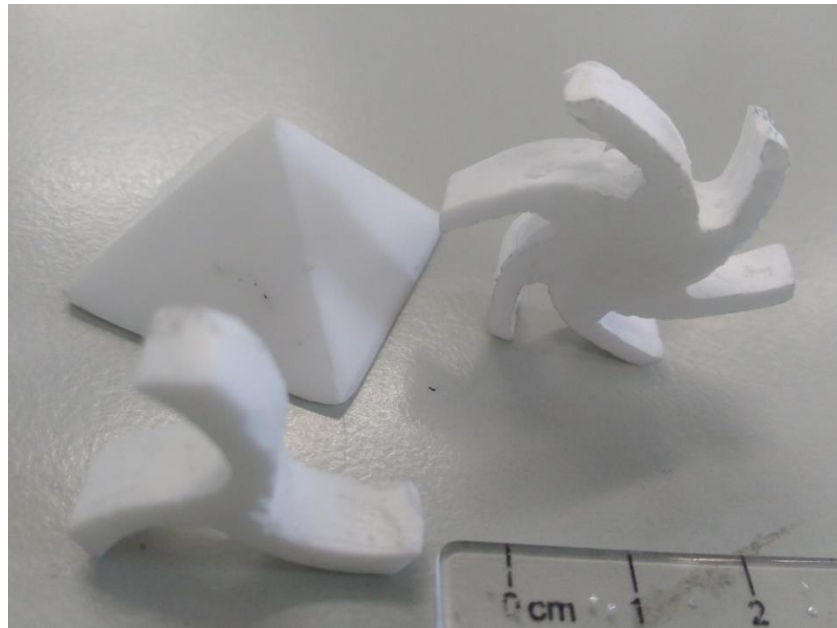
Complex shaped parts produced using Isobam[®] system and sintered at 1650°C for 3 hrs (3-blade and 6-blade impellers as well as a solid 4 sided pyramid).
